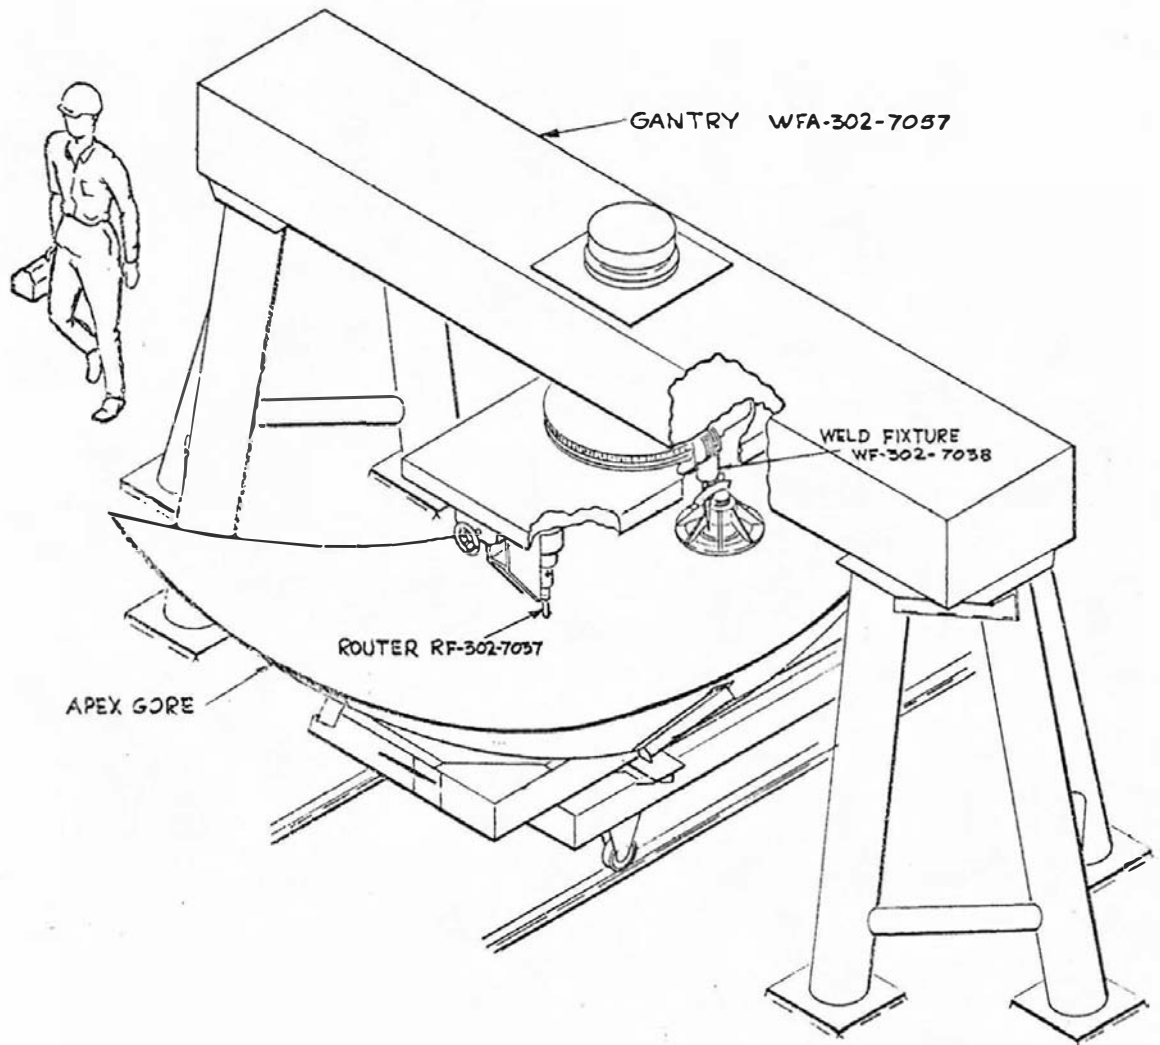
Routing and Welding Fittings to Apex Gore
